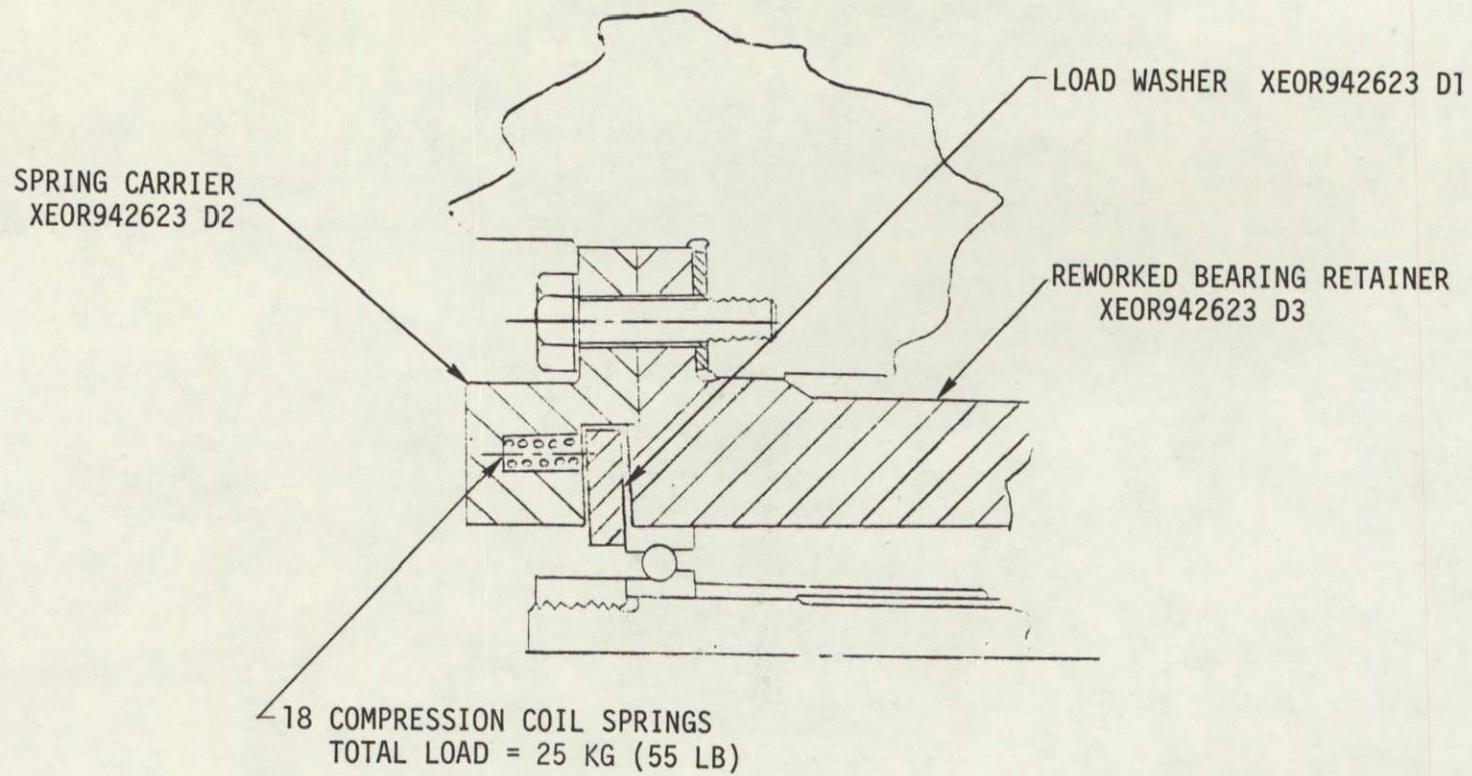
Modified Tester Bearing Preload Spring Arrangement
